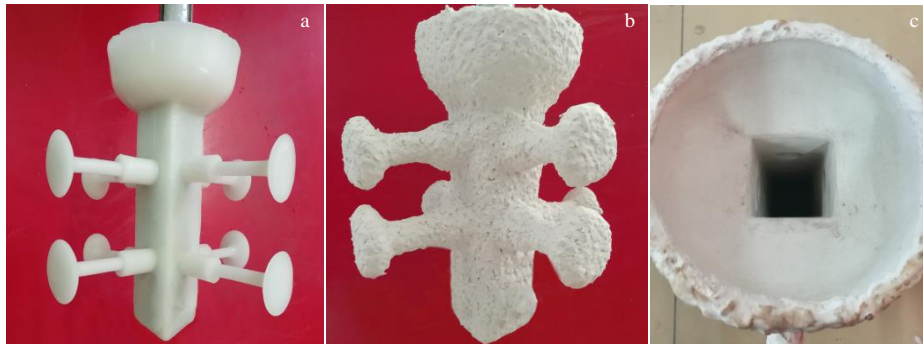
Physical images of the assembled wax mold (a), the cured shell mold (b) and the sintered shell mold (c)
